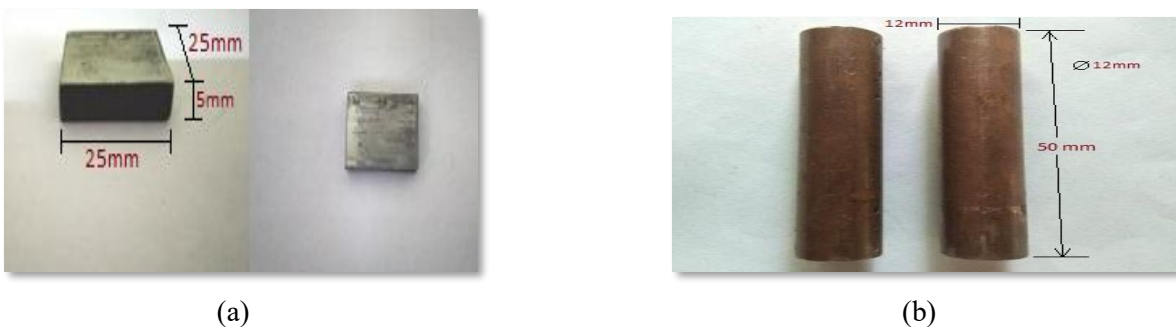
(a) Dimension of D3 steel workpiece (b) Copper Tool.
